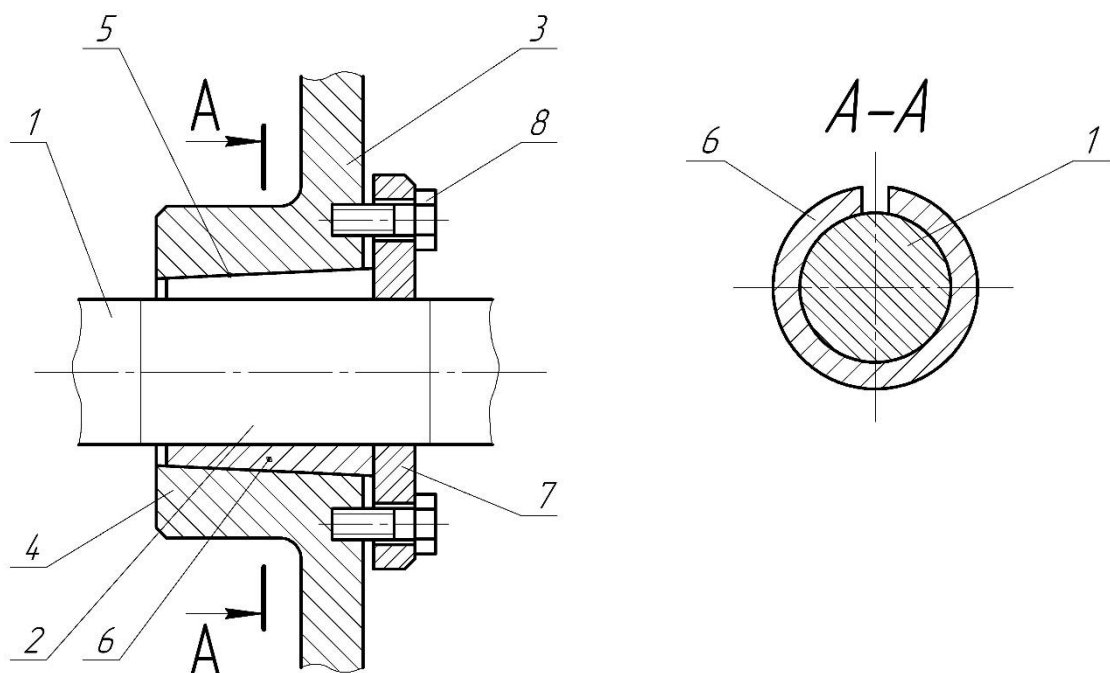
Keyless connection of a part to a shaft (proposed design)
